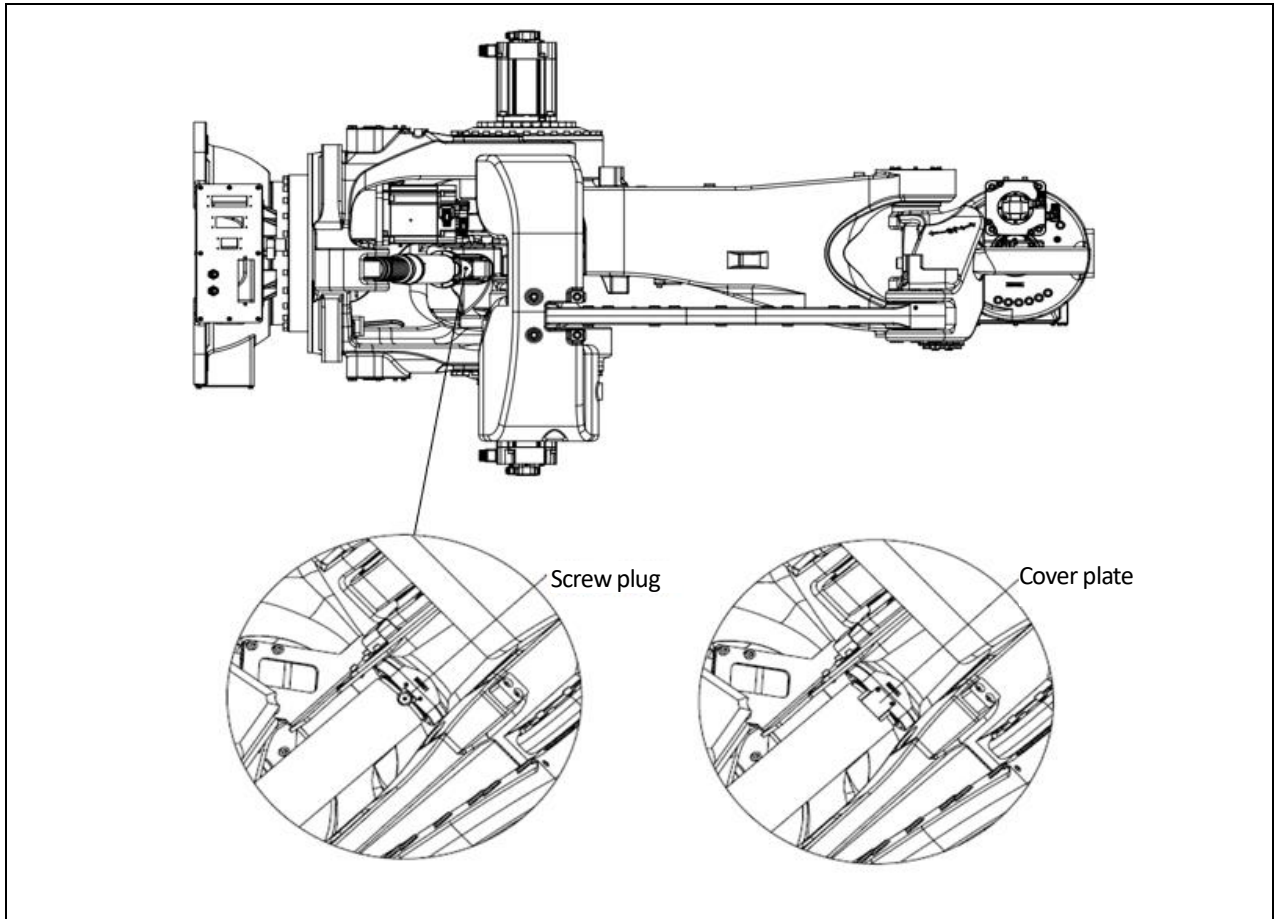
check for gas spring (ER350-3300, ER500-2800, ER600-2800, ER700-2800)
